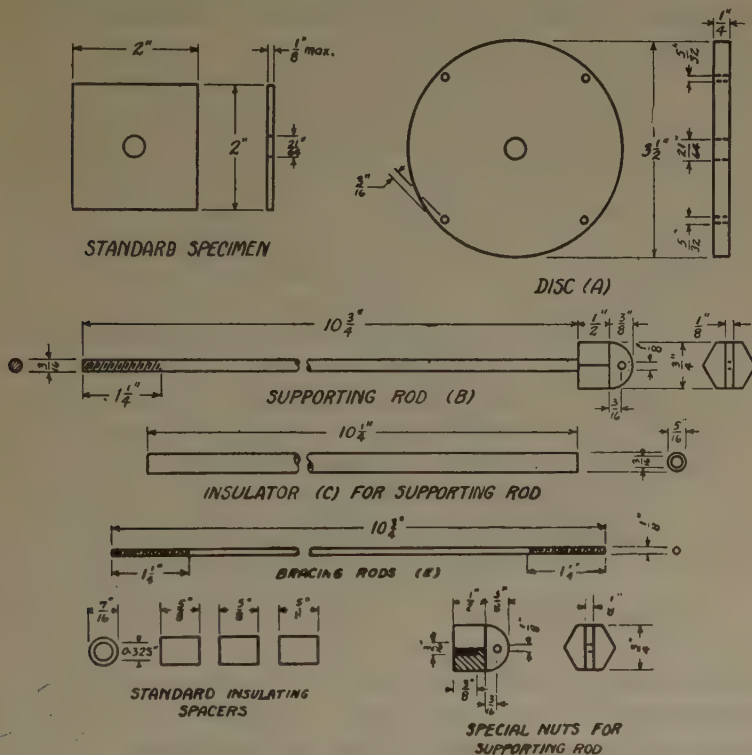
DIMENSIONS OF PARTS OF SPOOL-TYPE SPECIMEN HOLDER.
